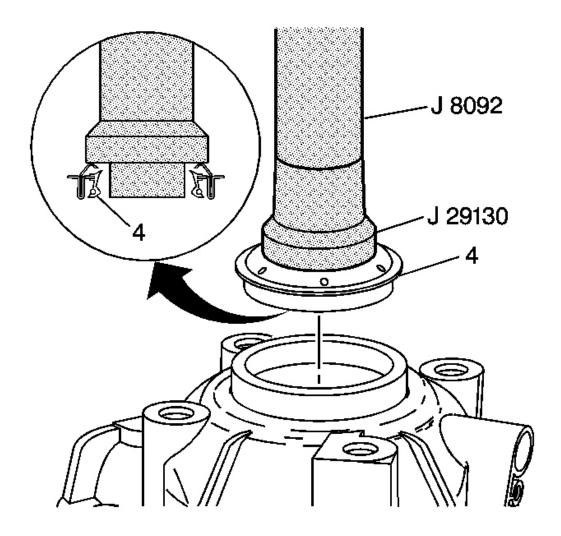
Installing Axle Oil Seal With J 29130 & J 8092 Courtesy of GENERAL MOTORS CORP.
